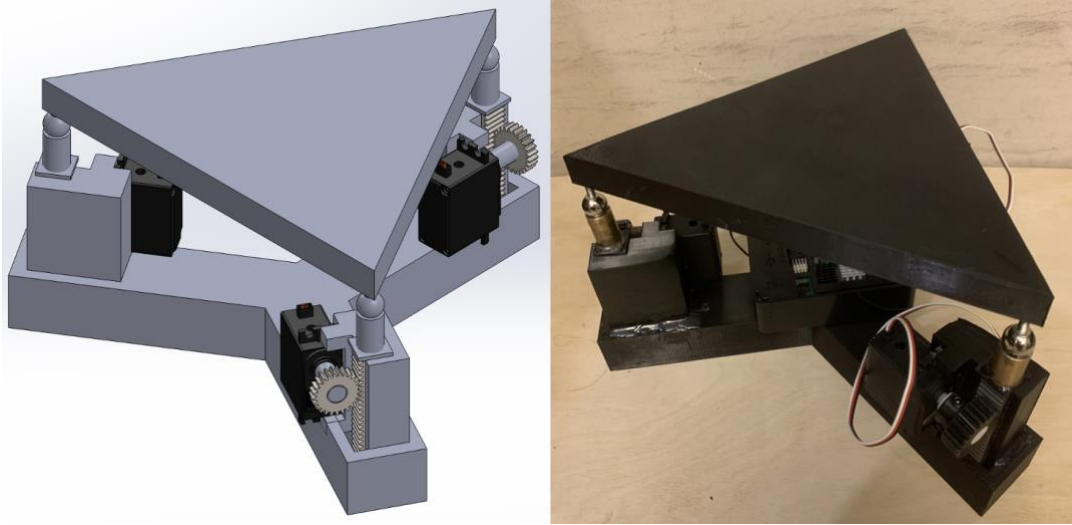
3D CAD Model (Left) and the Actual Final Assembly (Right)
